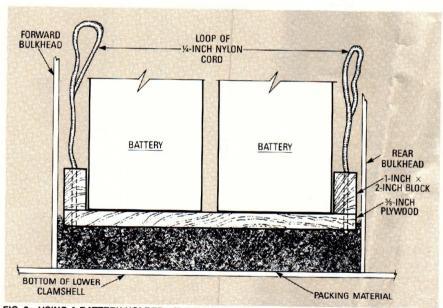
USING A BATTERY HOLDER will make installing and removing the batteries easier.
